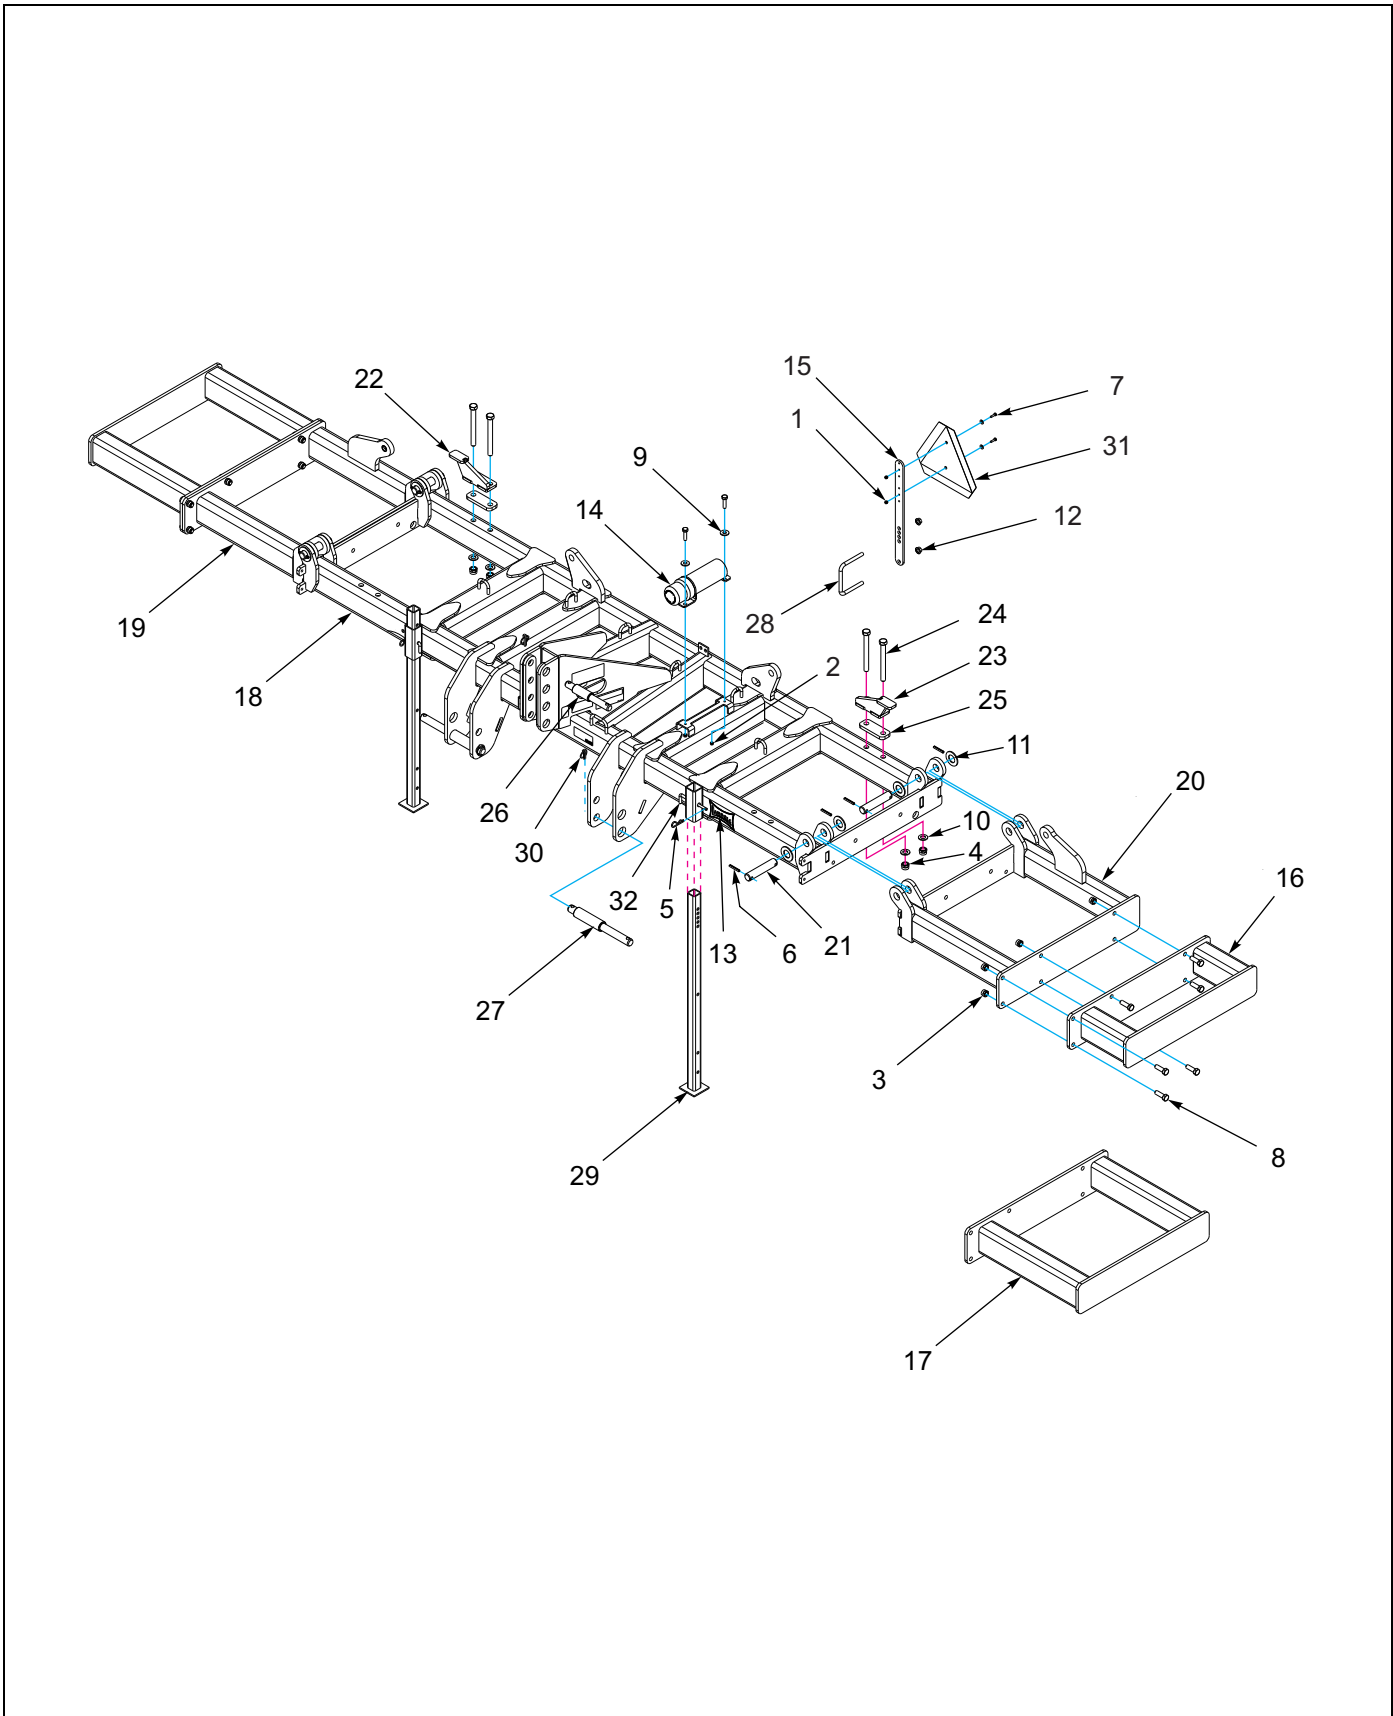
Folding Frame Assembly - 7, 8, & 9 Shank
